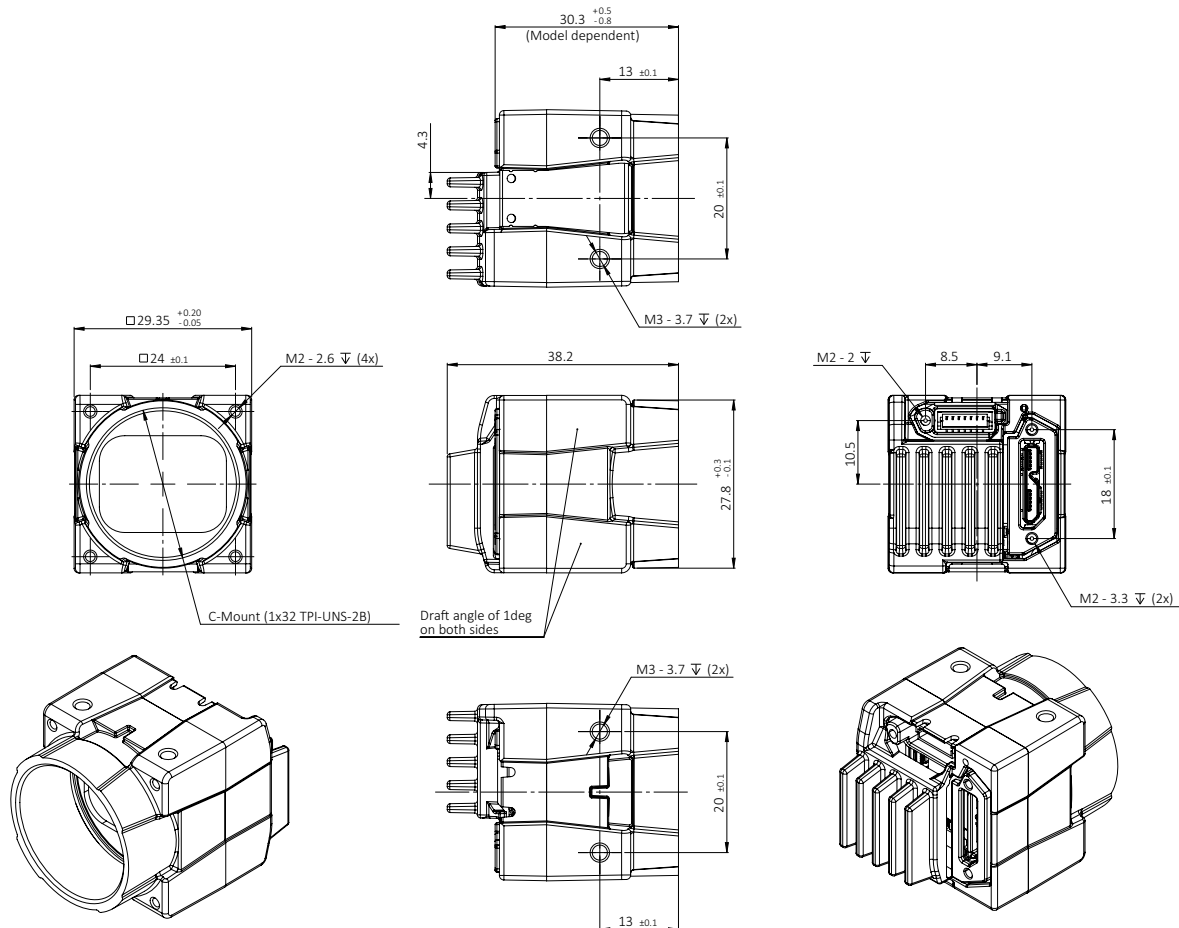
Closed Housing C-Mount 180° (standard Alvium) dimensions
